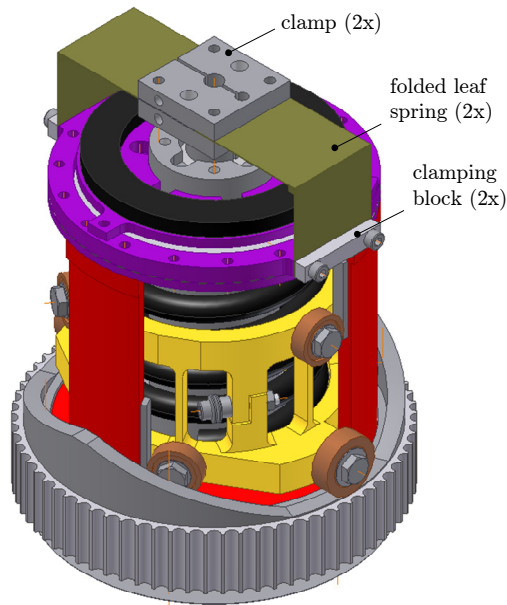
A clamp is fixed to the drive-aid motor axle. With two folded leaf springs, the motor torque is passed on to the clamping rings. The extra clamp is used to add an encoder on top.
